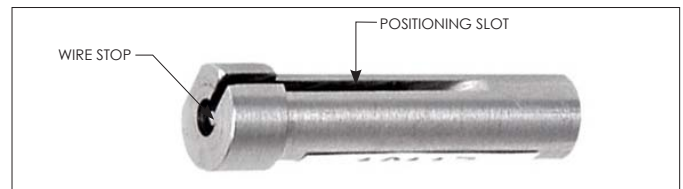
Figure B. Locator positioning slot and wire stop only found on Part # 910 104 127.
